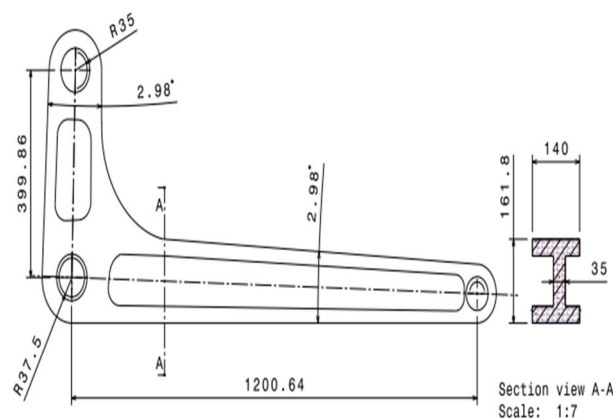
Manufacturing drawing of right angle lever all dimensions in (mm)
